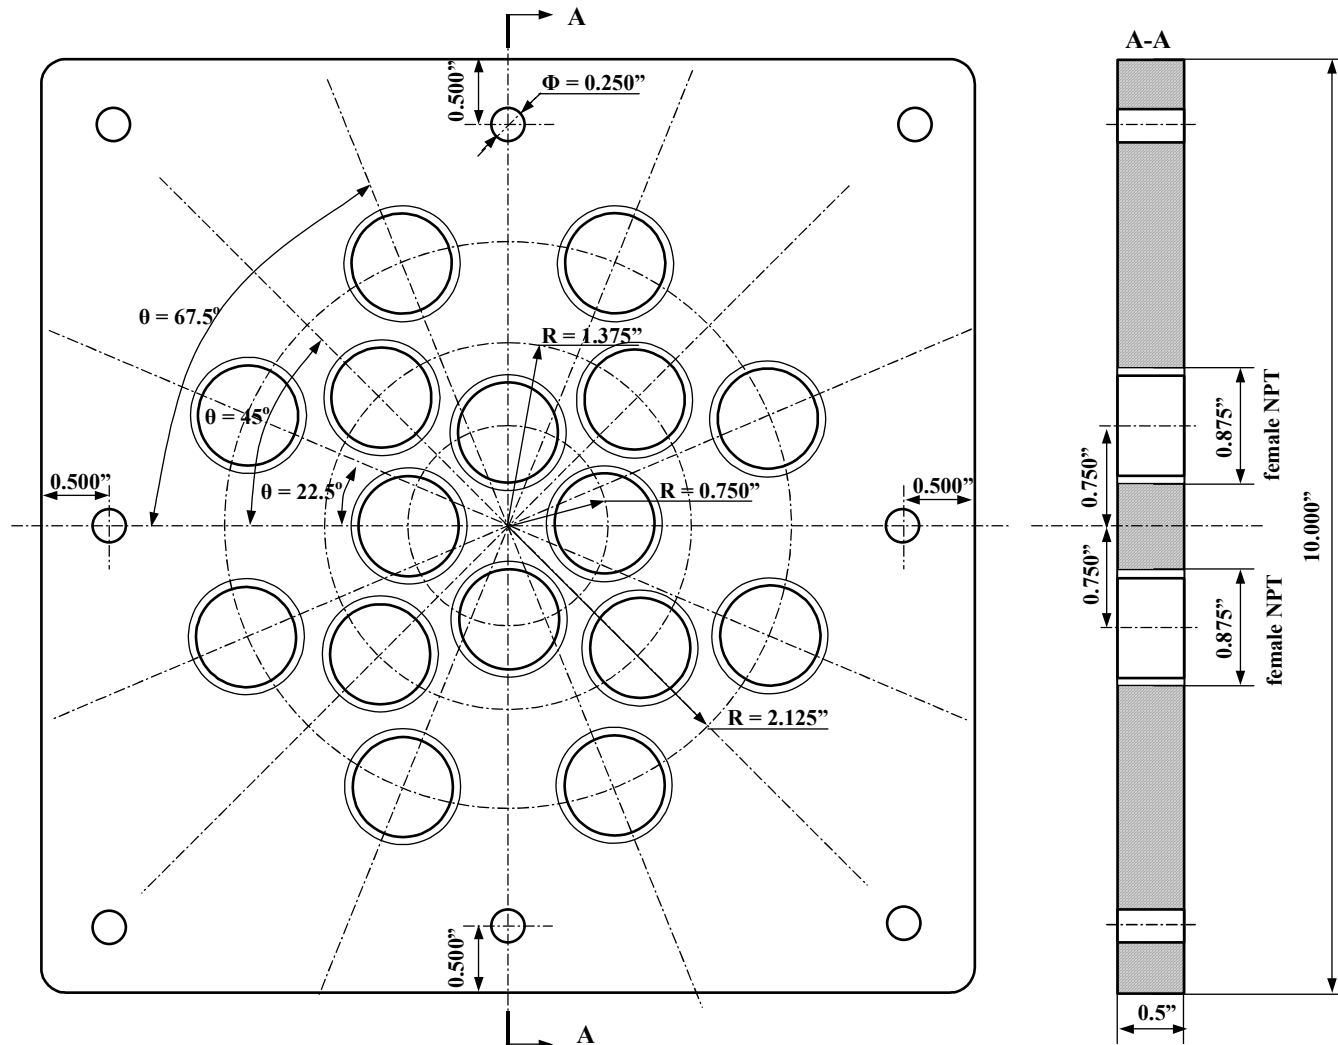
Engineering drawing for the cell support plate without the screw-in nipples.
